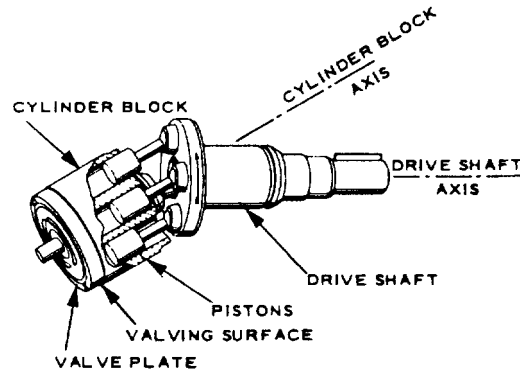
Bent-Axis Type Axial Piston Pump
